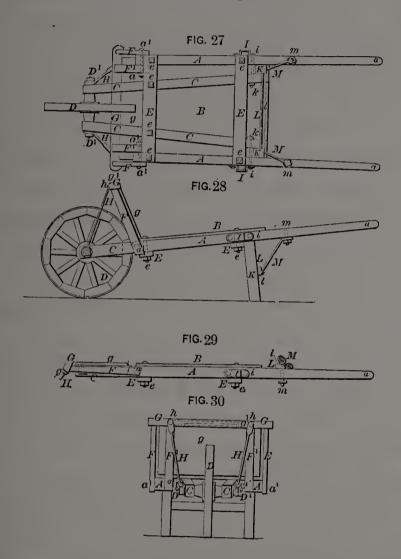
is a bottom view of a folding wheelbarrow. Fig. 28 is a side elevation of the same. Fig. 29 is a side view of the same when folded up, and Fig. 30 is a back view of the barrow.
